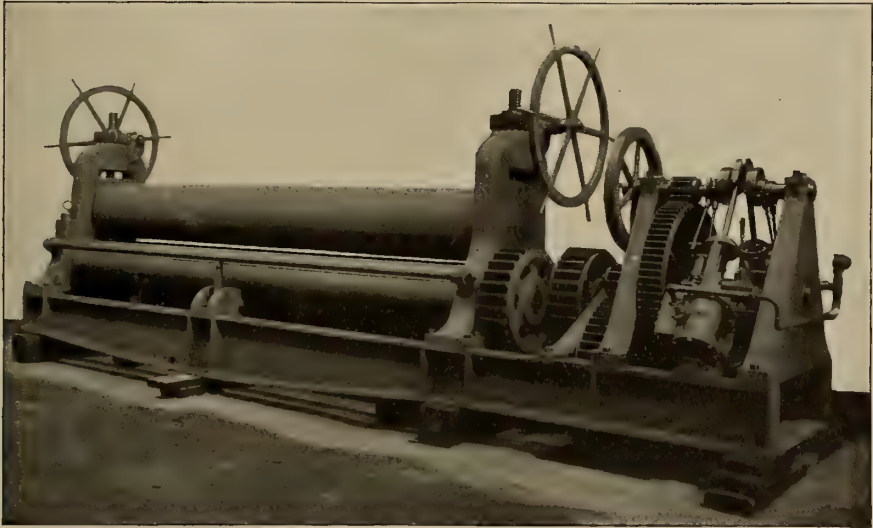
ONE OF MESSRS. BERRY & SONS' PLATE BENDING MACHINES.
